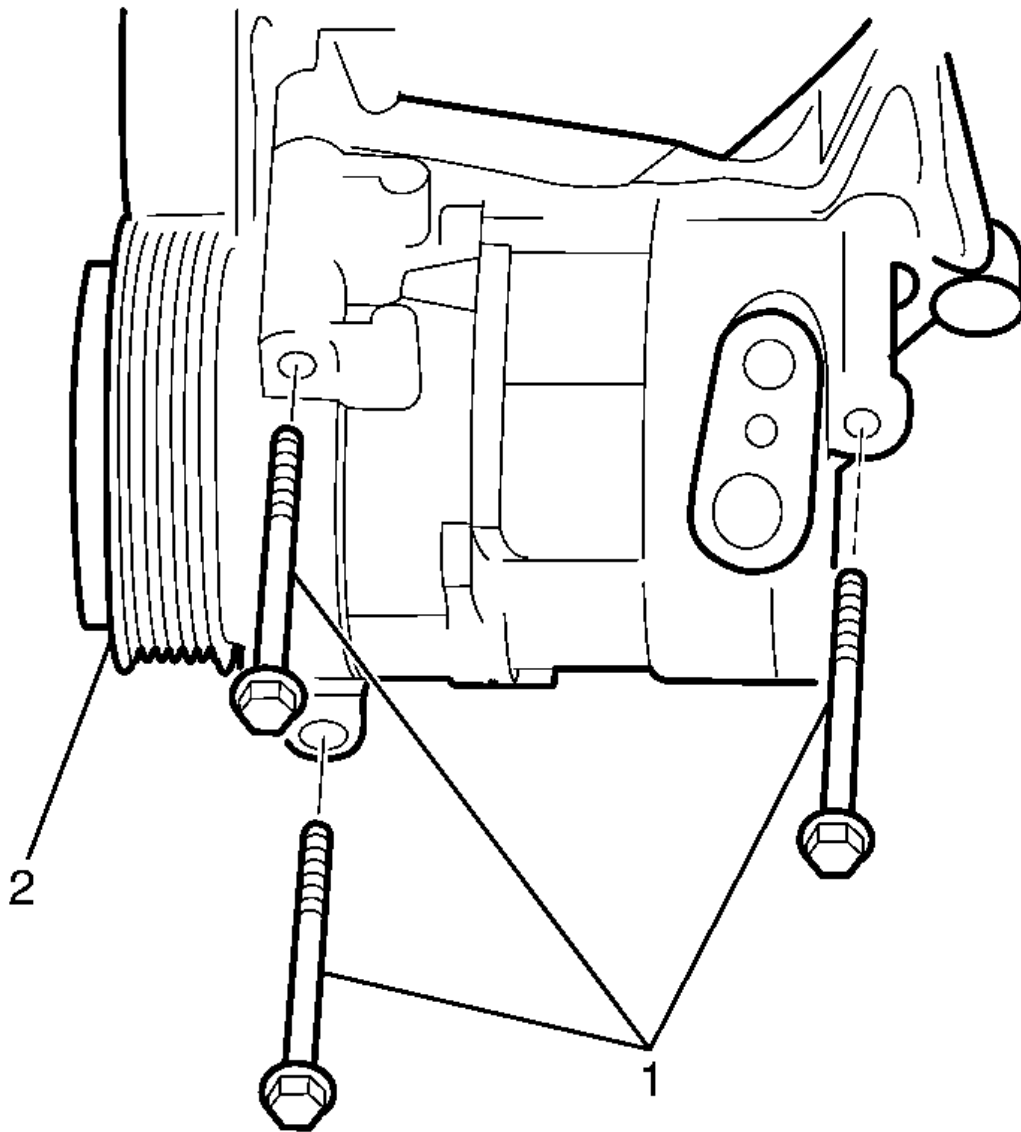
Identifying A/C Compressor Bracket To Cylinder Block Retaining Bolts
